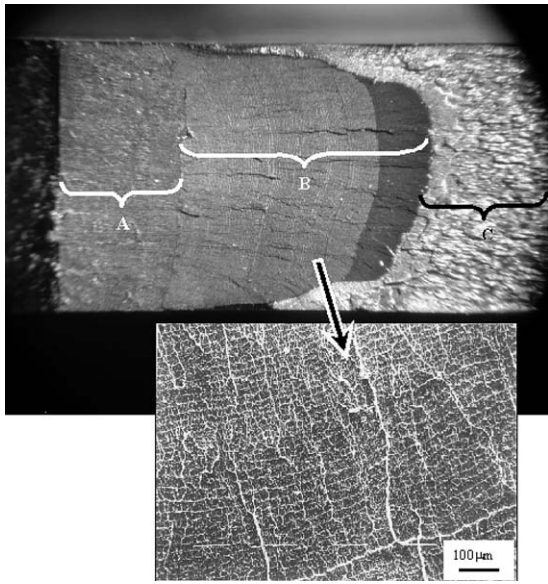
Typical fracture surface of a CANDU CCT specimen.
